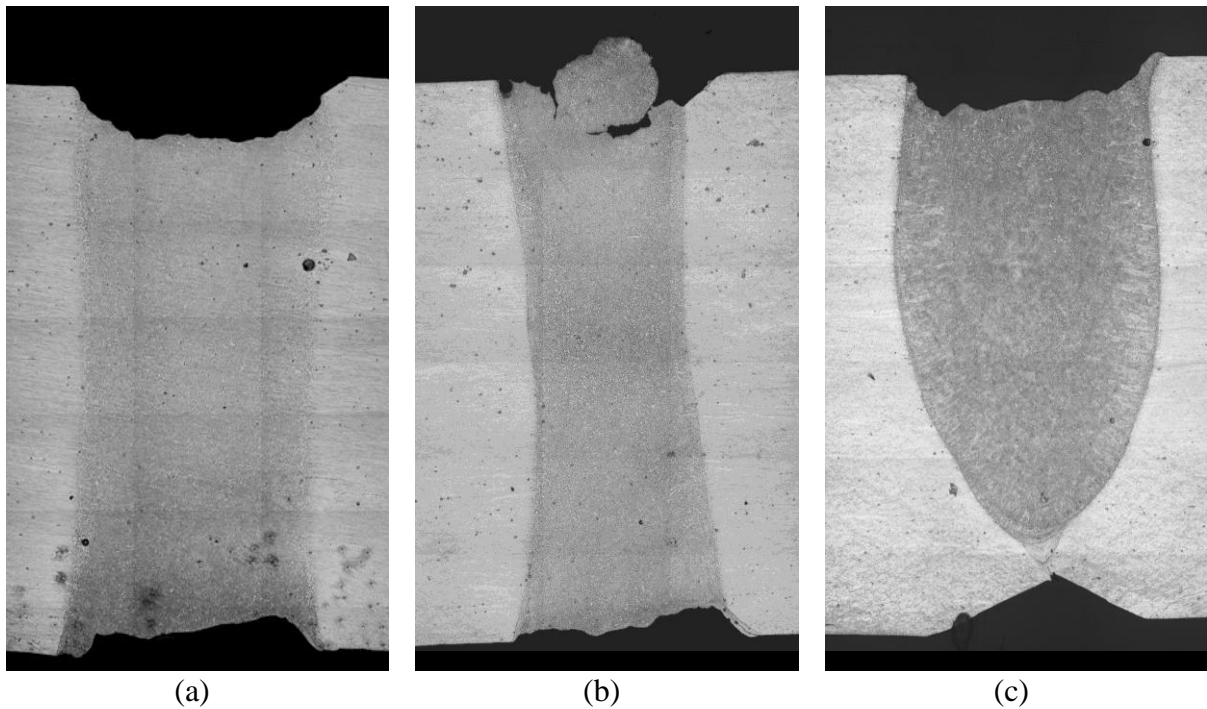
Representative transverse sections of the 2 mm thick sheet fibre laser weld fusion zones made at: a) 2 kW and 50 mm/s, b) 3.5 kW and 150 mm/s, and c) 2 kW and 250 mm/s.
